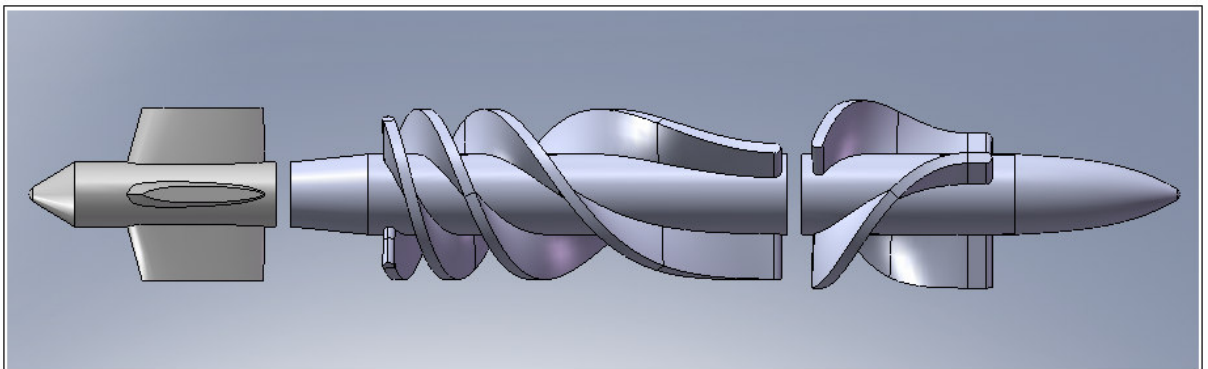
Diffuser geometry which is designed by using arc
